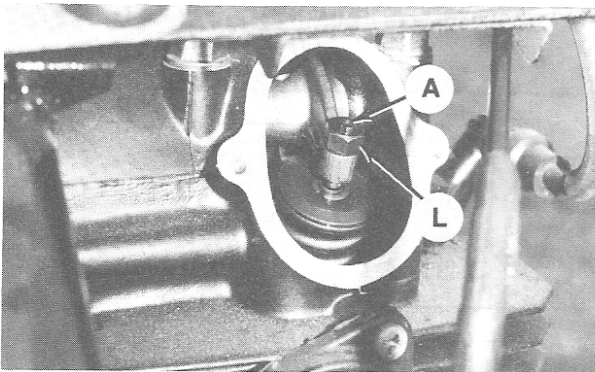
Valve clearance on all models should be 0.08-0.13 mm (0.003-0.005 in.) for intake valve and 0.17-0.22 mm (0.007-0.009 in.) for exhaust valve. Loosen locknut (L) and turn adjuster screw (A) to adjust clearance.
